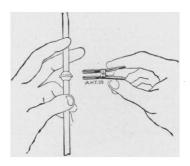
Showing method of attaching to joint. Parts held securely by spring upon release of finger pressure.
